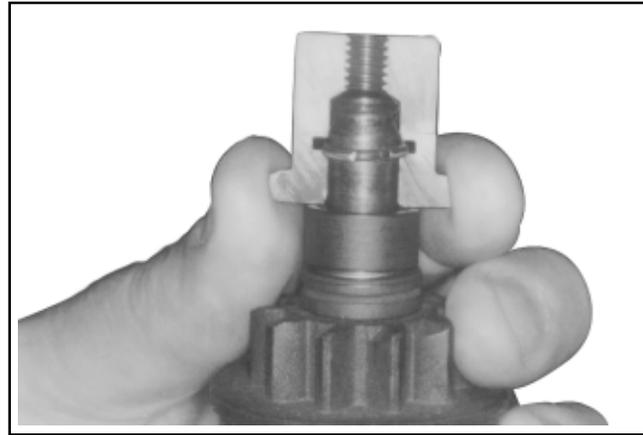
Assembling Inner Half of Tool Around Armature Shaft and Retaining Ring.
